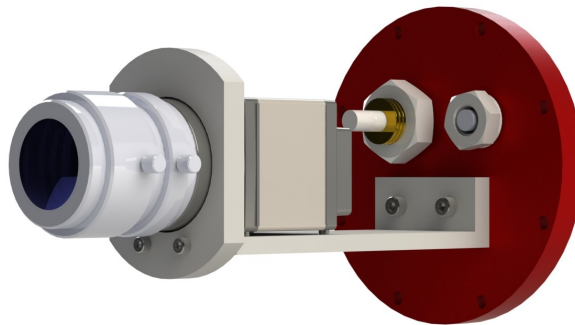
Aurora External Forward Enclosure Bracket Assembly
